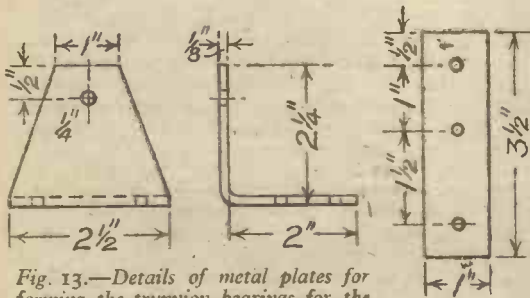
Details of metal plates for forming the trunnion bearings for the pump lever.
